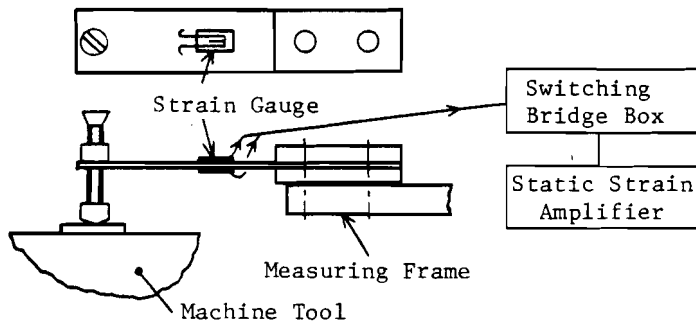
Measurement of absolute thermal displacement of machine tool
